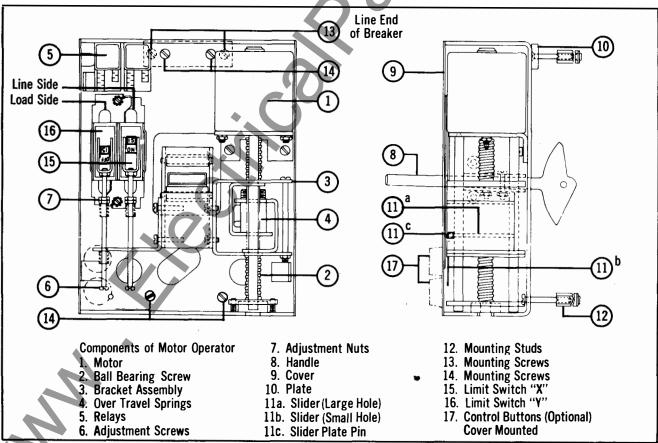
Motor Operator Mechanism <sup>(1)</sup>
